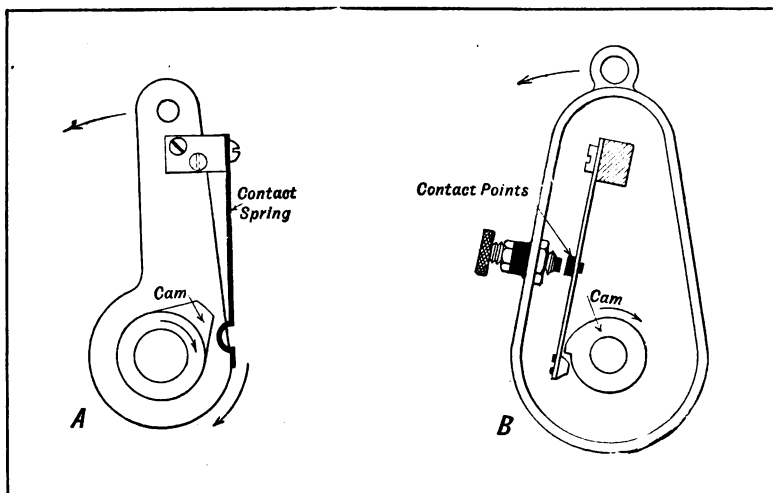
Simple Forms of Contact Breakers or Timers Used on One Cylinder Engines. A—Wipe Contact. B—Touch Contact.
